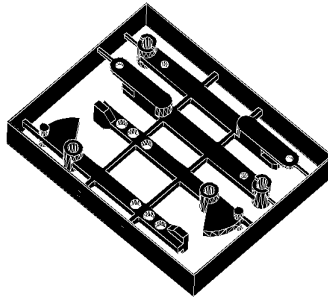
Example of Parts Mounted in a Frame Ready for Machining.
